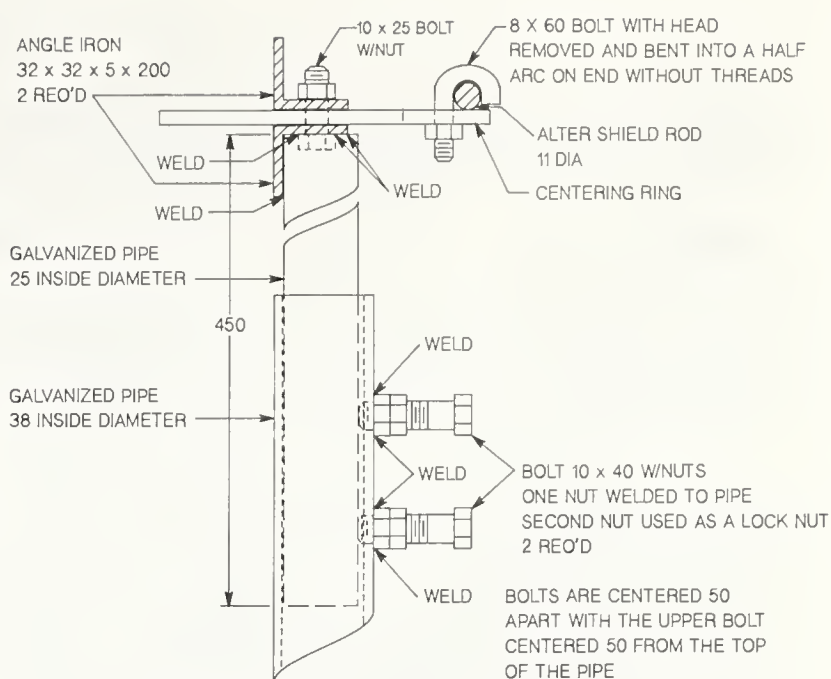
Drawing showing attachment of modified Alter windshield rod to centering ring, attachment of centering ring to telescoping pipe 25 mm in diameter, and the position of nuts and bolts used to lock telescoping pipe in position; dimensions are in millimeters.
